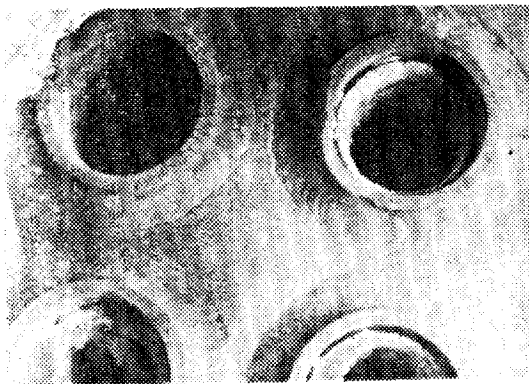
Circumferential Cracks at Toe of Fillet Welds, Small Area of Craze Cracking on Tubesheet
